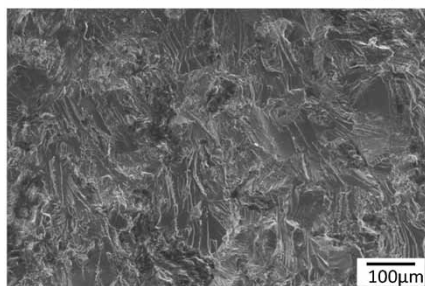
Fractograph in rotary bending fatigue test under optimized condition of forging
